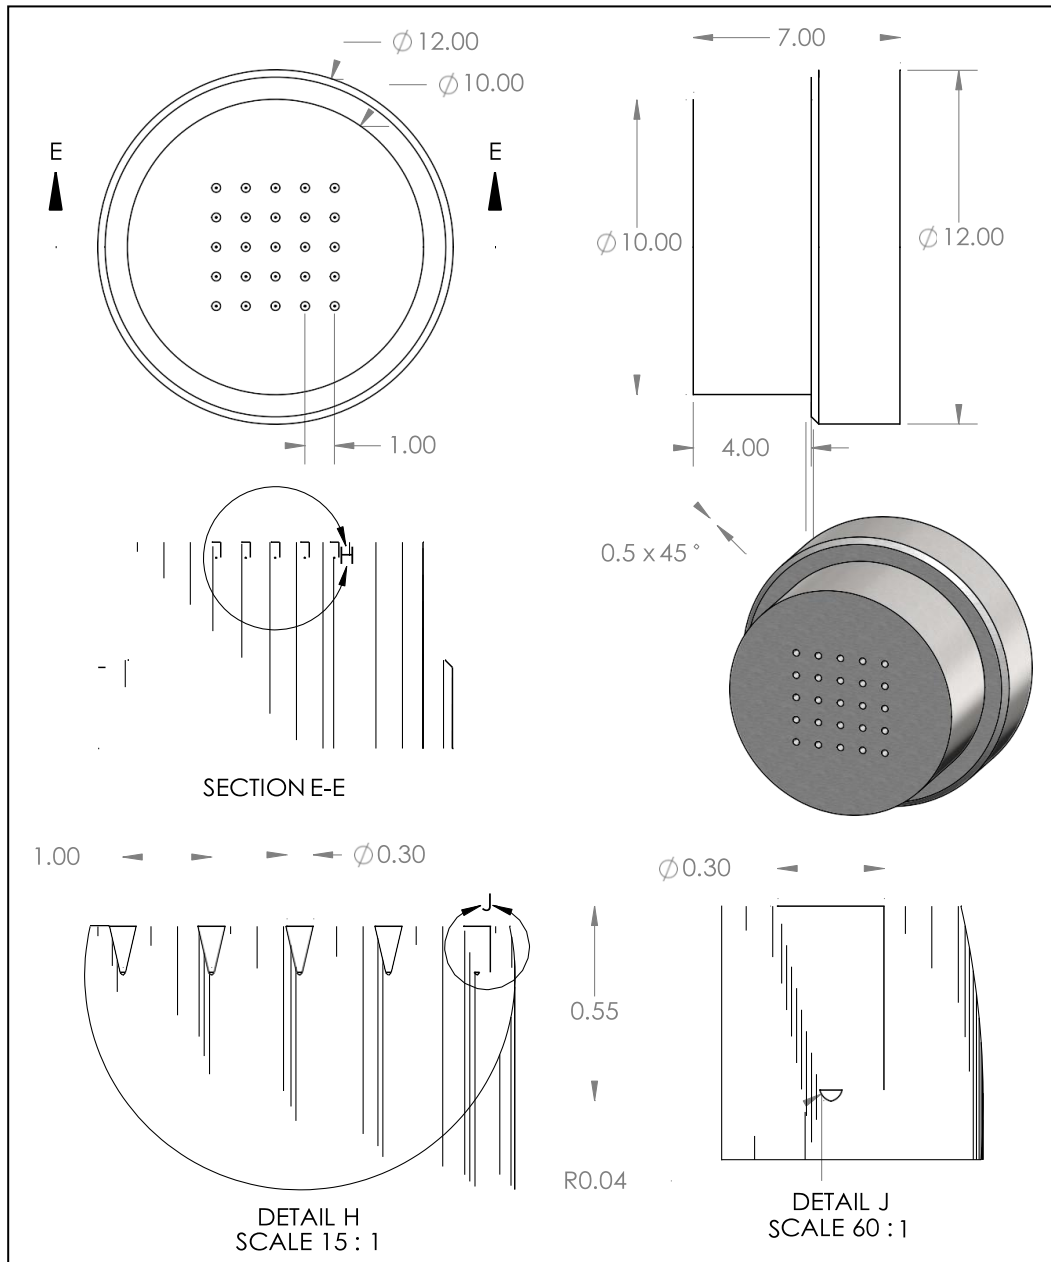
Dimensional details of the 5x5 EDM machined microneedle insert. All dimensions are given in mm unless otherwise specified.
